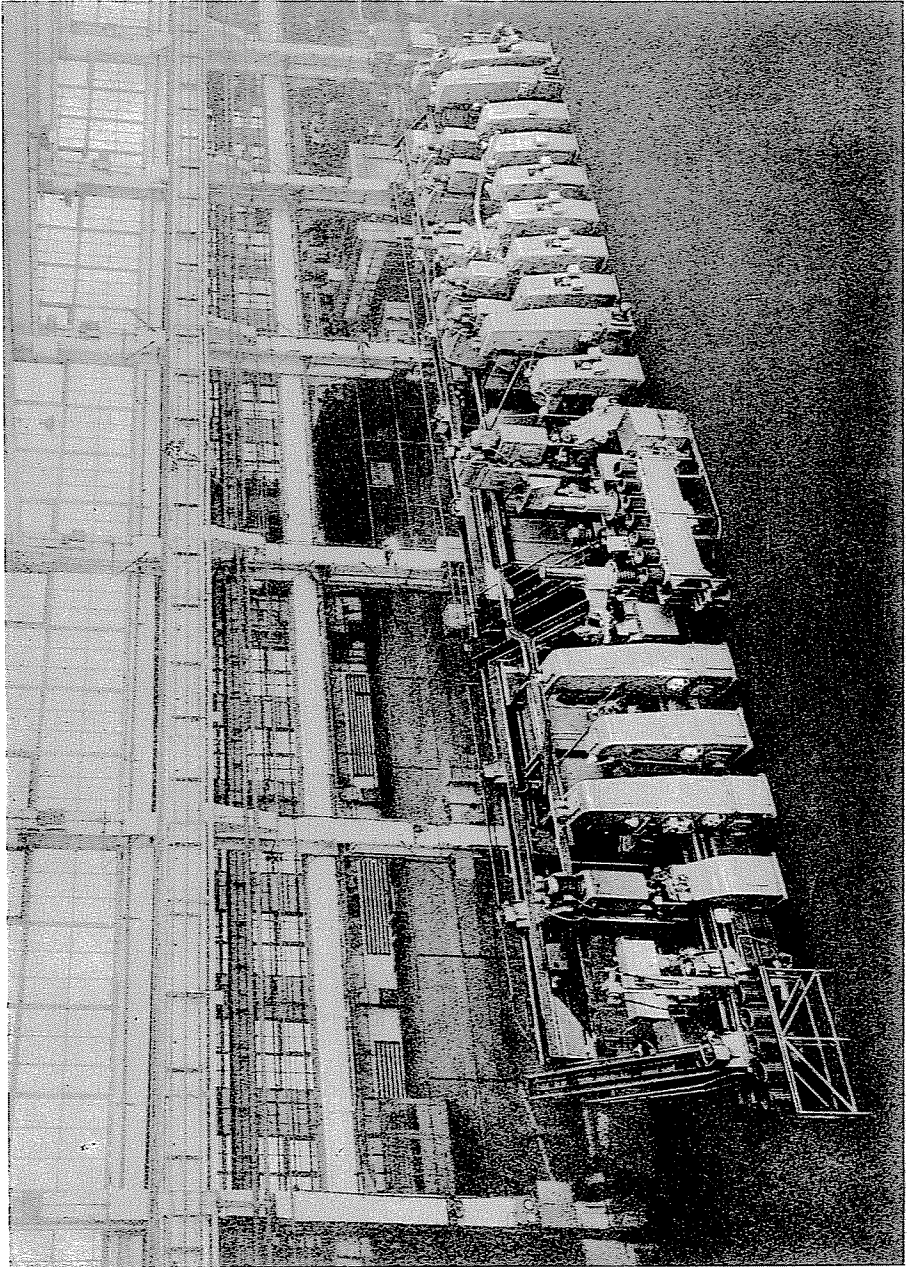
Type CSz 2 Transfer Machine for machining of motor casings
